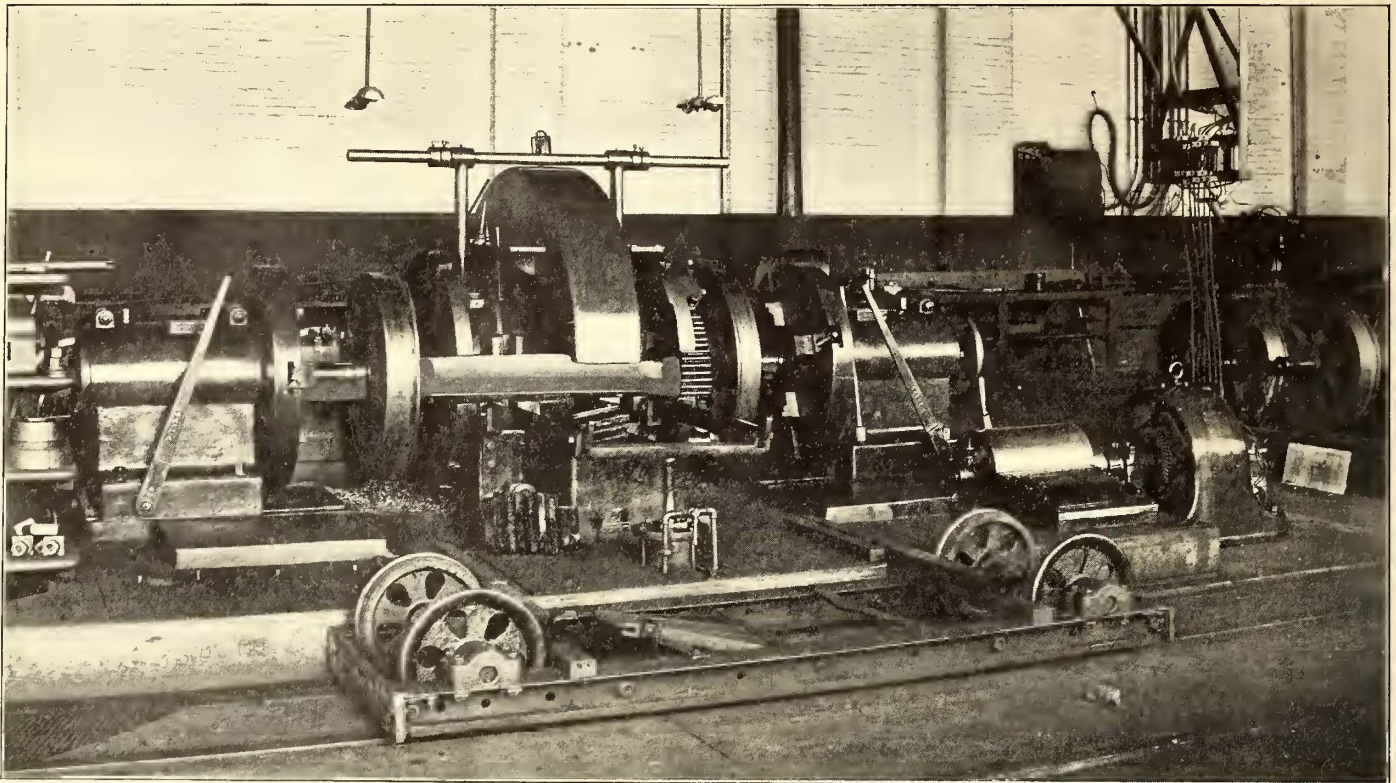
WHEEL LATHE WITH SECTIONAL GEAR, SHOWN WITH GEAR CASE RAISED
